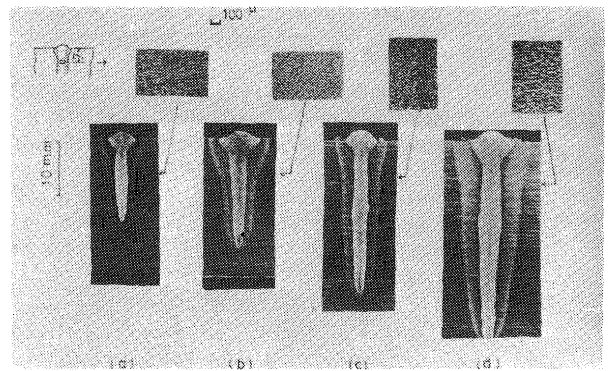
Macro-and microphotographs for HT80 welds in various weld heat inputs.
